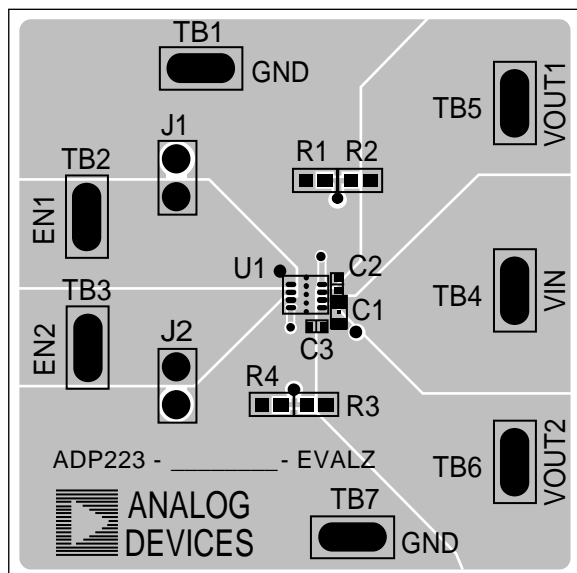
Example PCB Layout for the 8-Lead LFCSP
